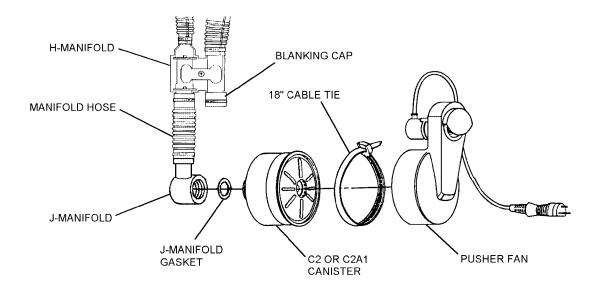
Assembling Pusher Fan Subassembly to J-Manifold - (V1) Only
